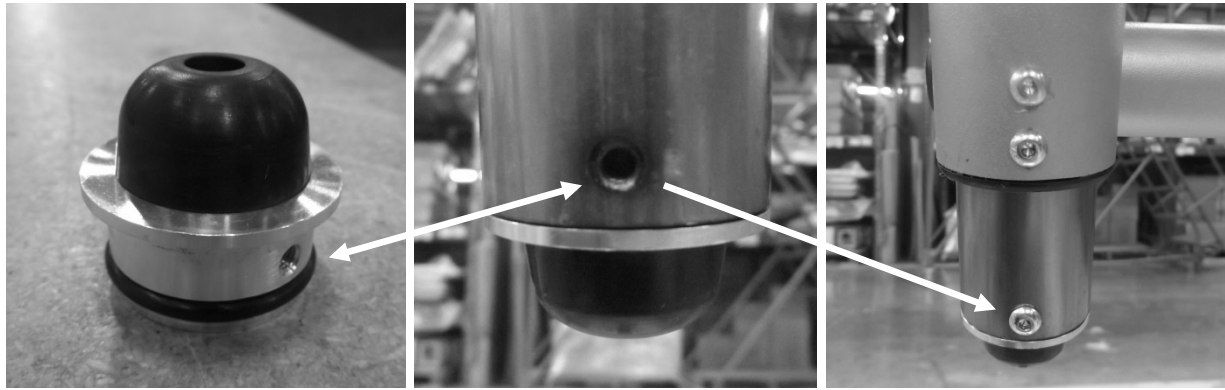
Rubber Bumper Stop (Left), Rubber Bumper Stop with Screw Hole Aligned with Seat Male Tube Assembly Screw Hole (Center), and a 10 x 32 Screw to Secure Rubber Bumper Stop (Right).
